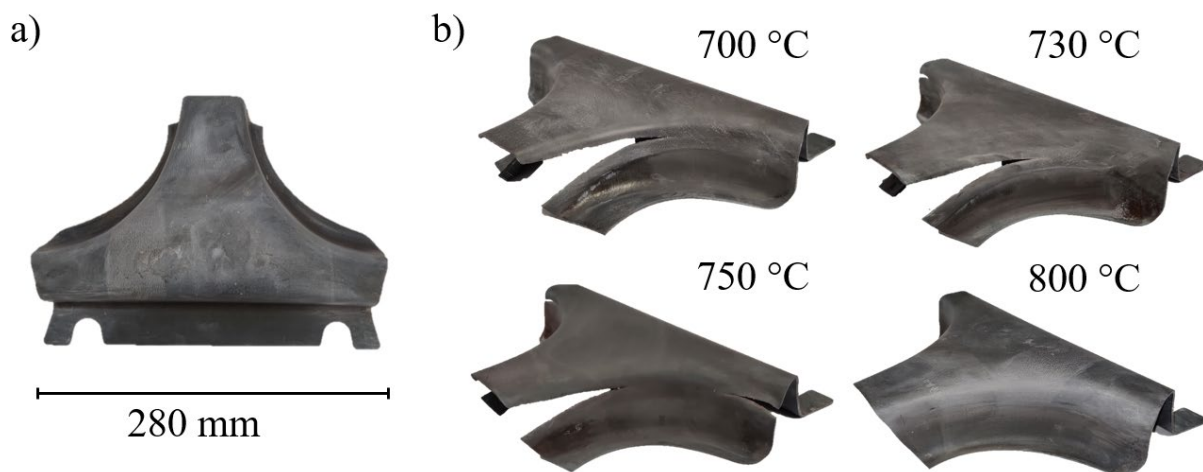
a) Dimensions of T-shape profile. b) T-shape profiles processed with different annealing temperatures.
